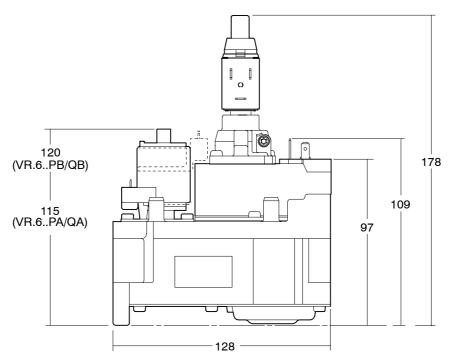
High-Low regulator fitted to a VR46../VR86.. gas control
